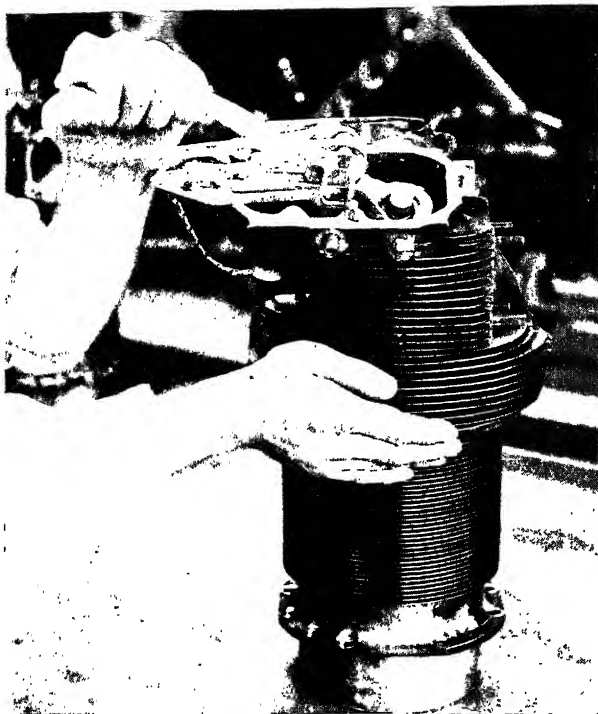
COMPRESSING SPRING FOR ASSEMBLY OF COLLETS
